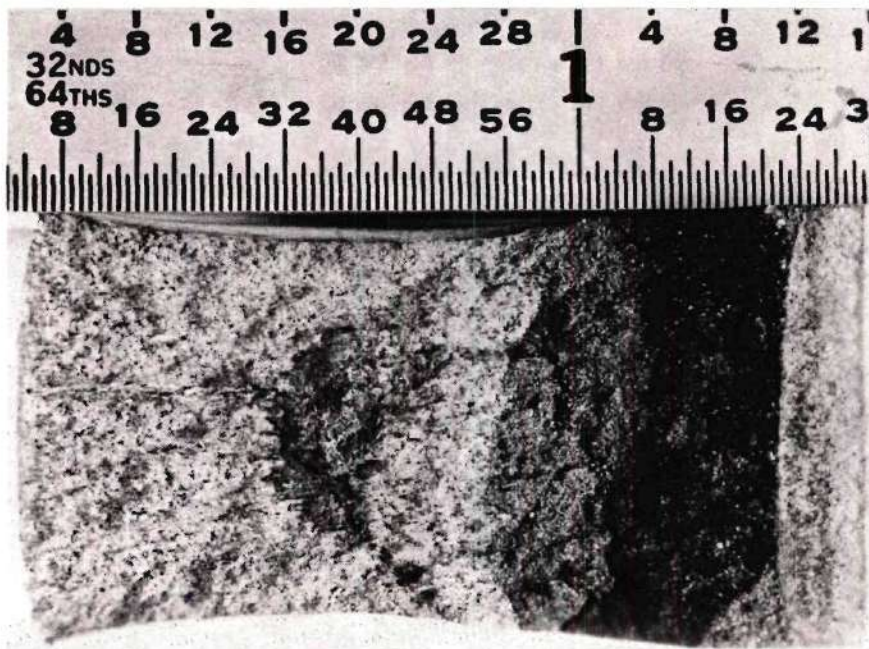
Fracture Surface of CT Specimen Showing Various Regions (Right to Left): Fatigue, SCC, Ductile Overload, SCC Reinitiation, Air Fracture.
